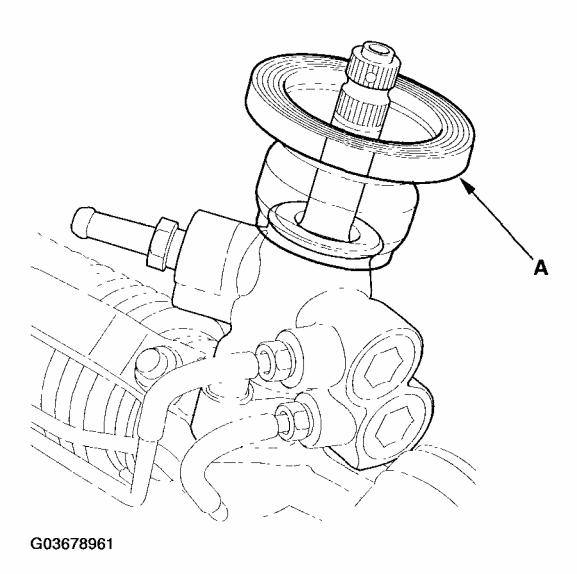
Identifying Pinion Shaft Grommet Courtesy of AMERICAN HONDA MOTOR CO., INC.
